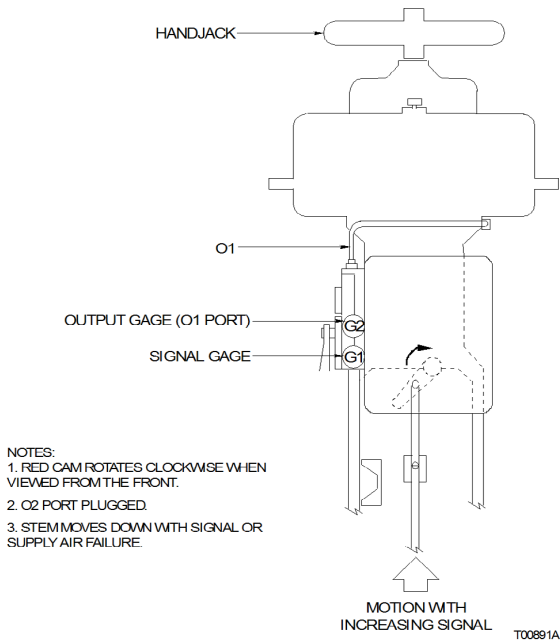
Reverse Acting, Bottom Loaded, Single Acting Tubing Example
